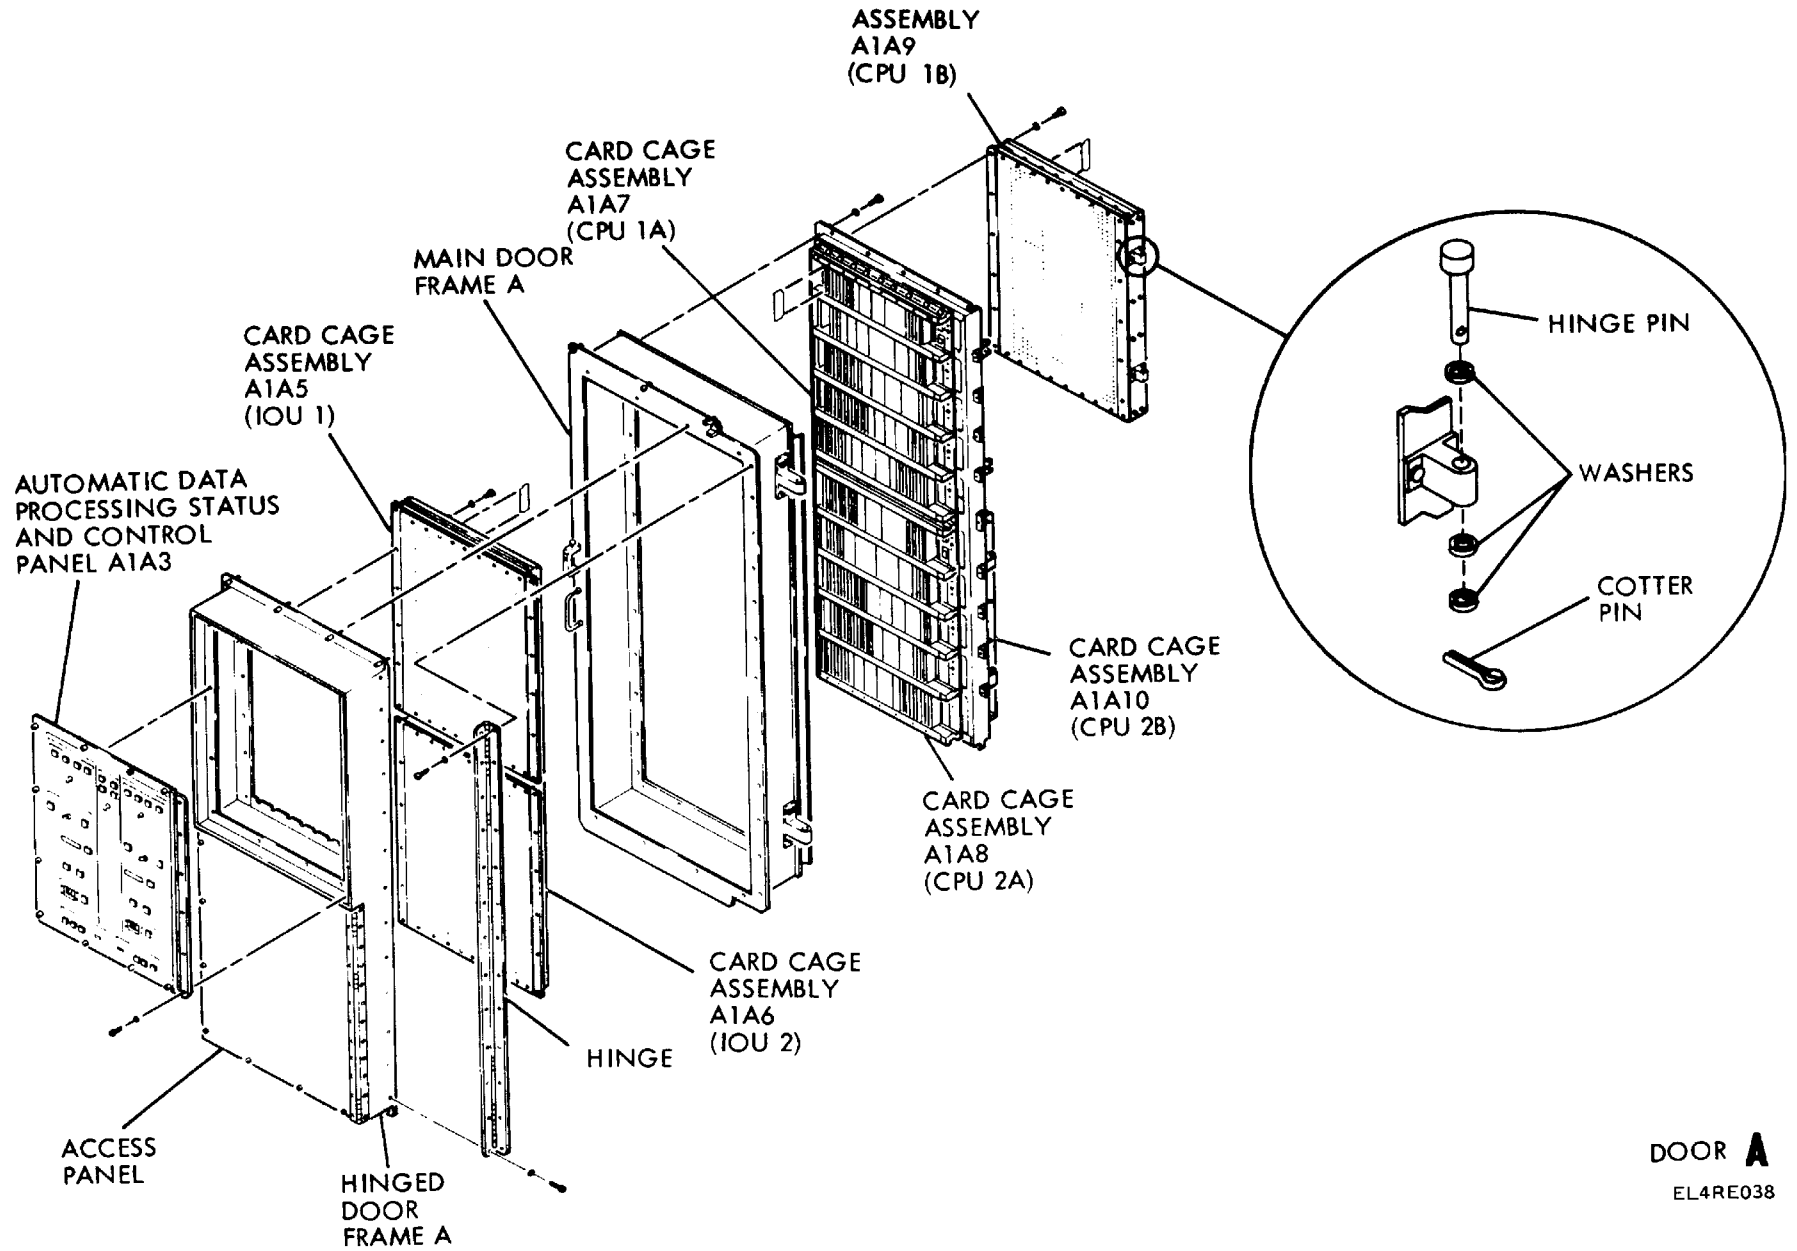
Message Switch ADP Assembly (Sheet 2 of 5).
